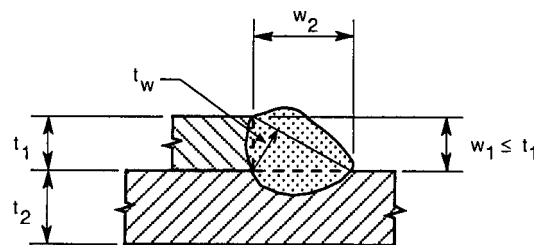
Throat thickness t_w of a fillet weld
